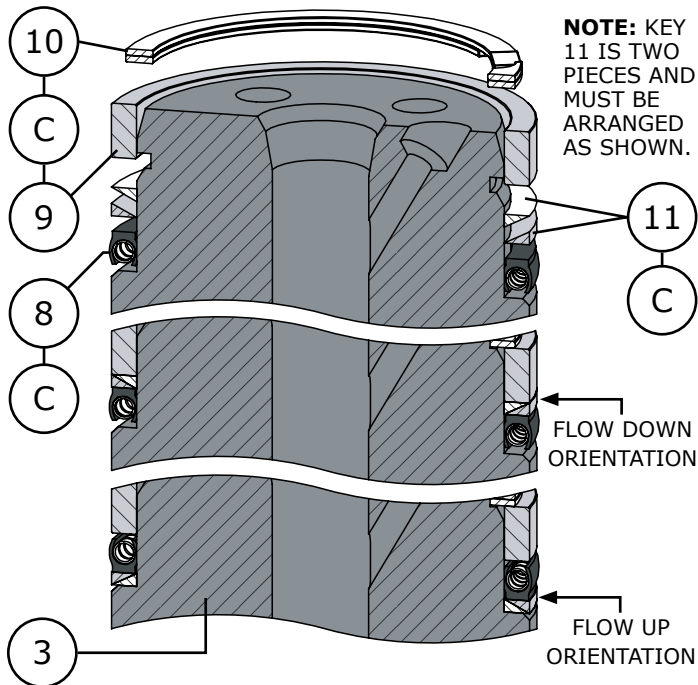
Plug Seal Assembly with Anti-Extrusion Ring
